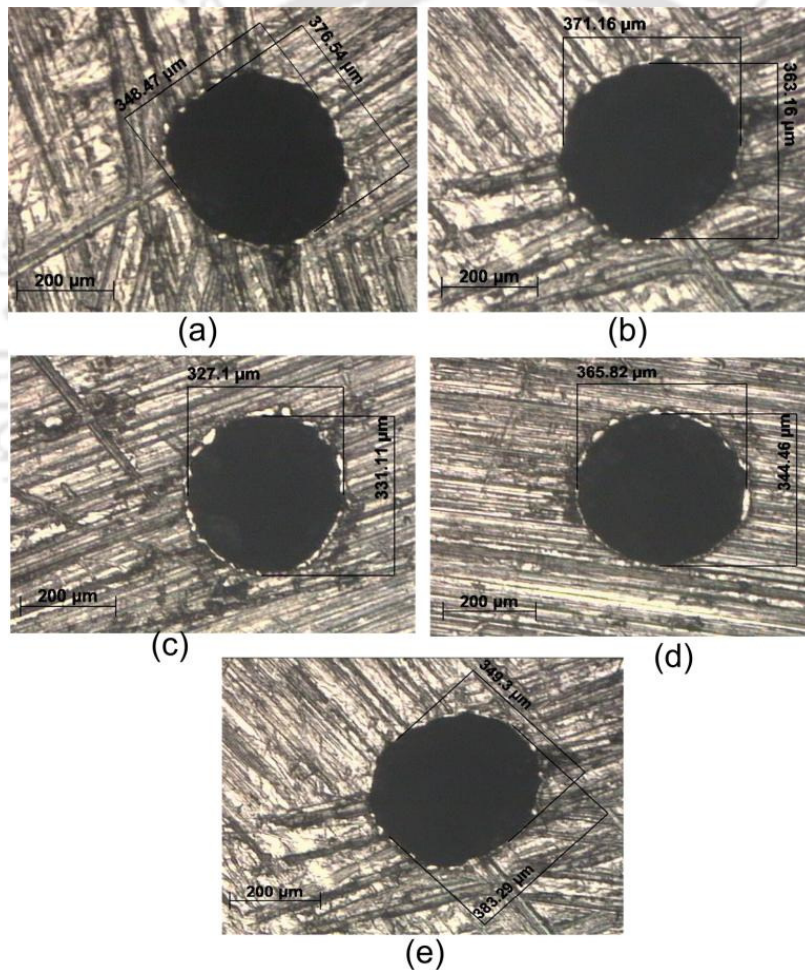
Dimensions of micro holes (a) centre hole and (b)-(e) peripheral holes
